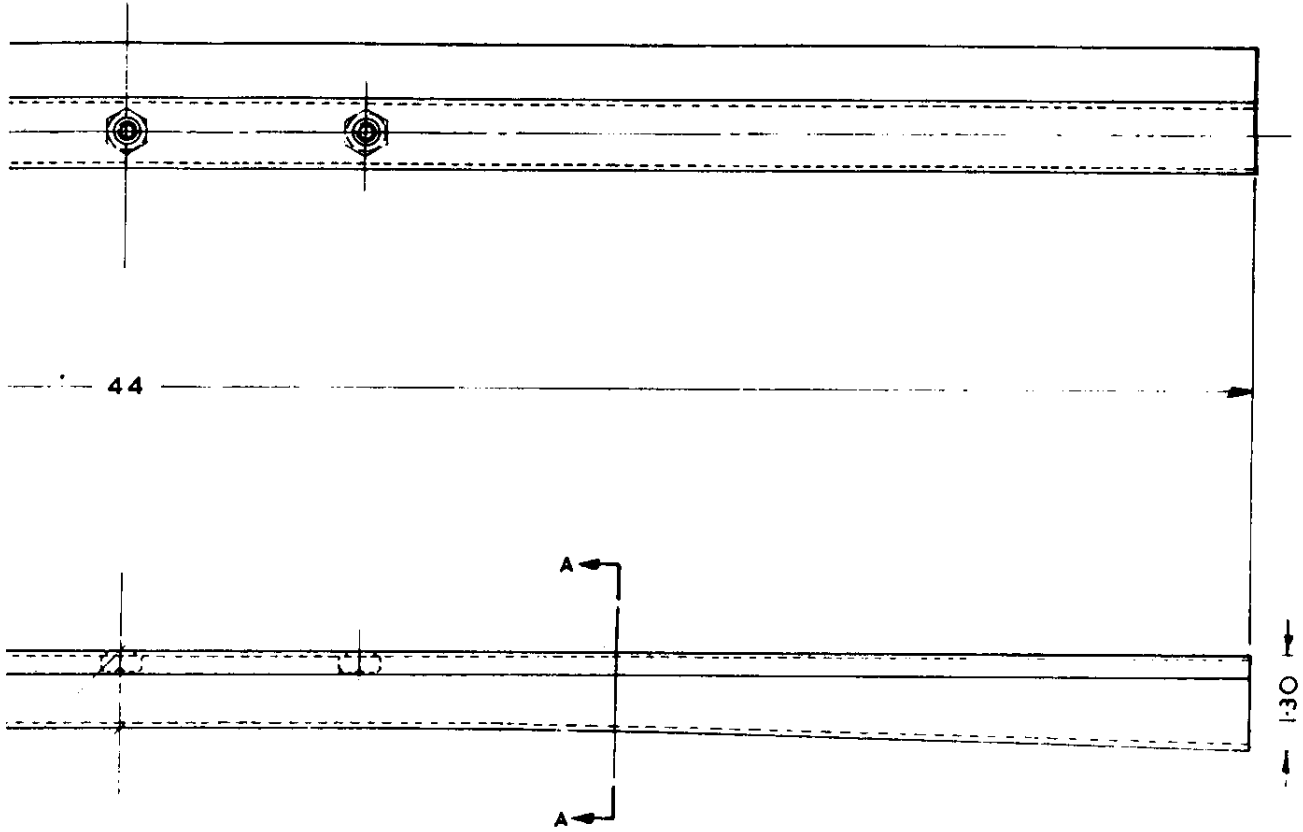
DISCARDED BRACKET MOUNTING FRONT
